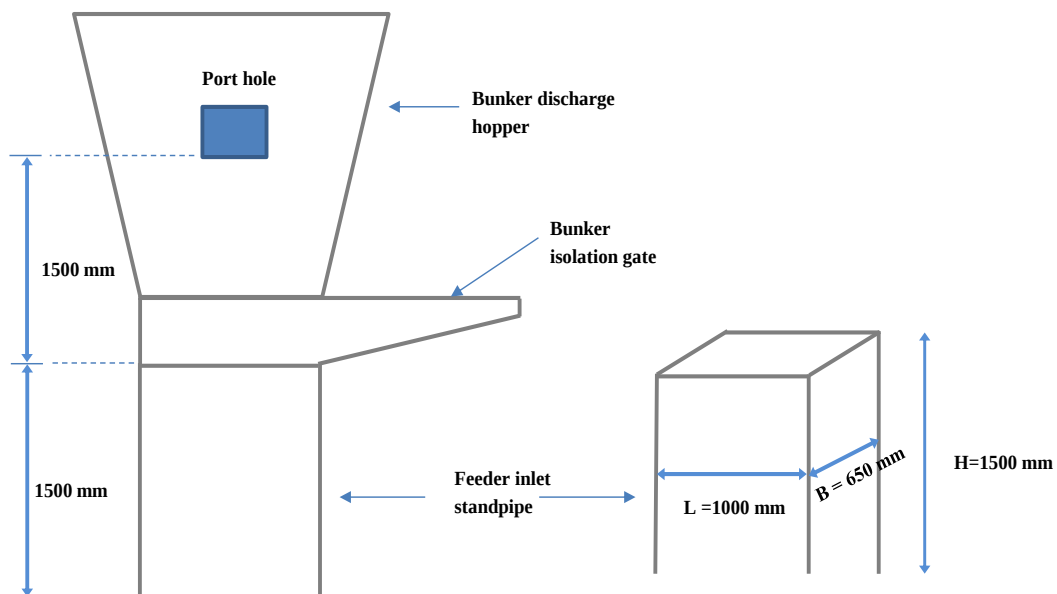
Front view highlighting raw coal chute configuration at Power Station B (Drawing is not to scale)
